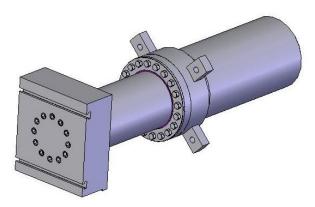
3D representation of the the press ram with the linear hydraulic motor piston assembly.
